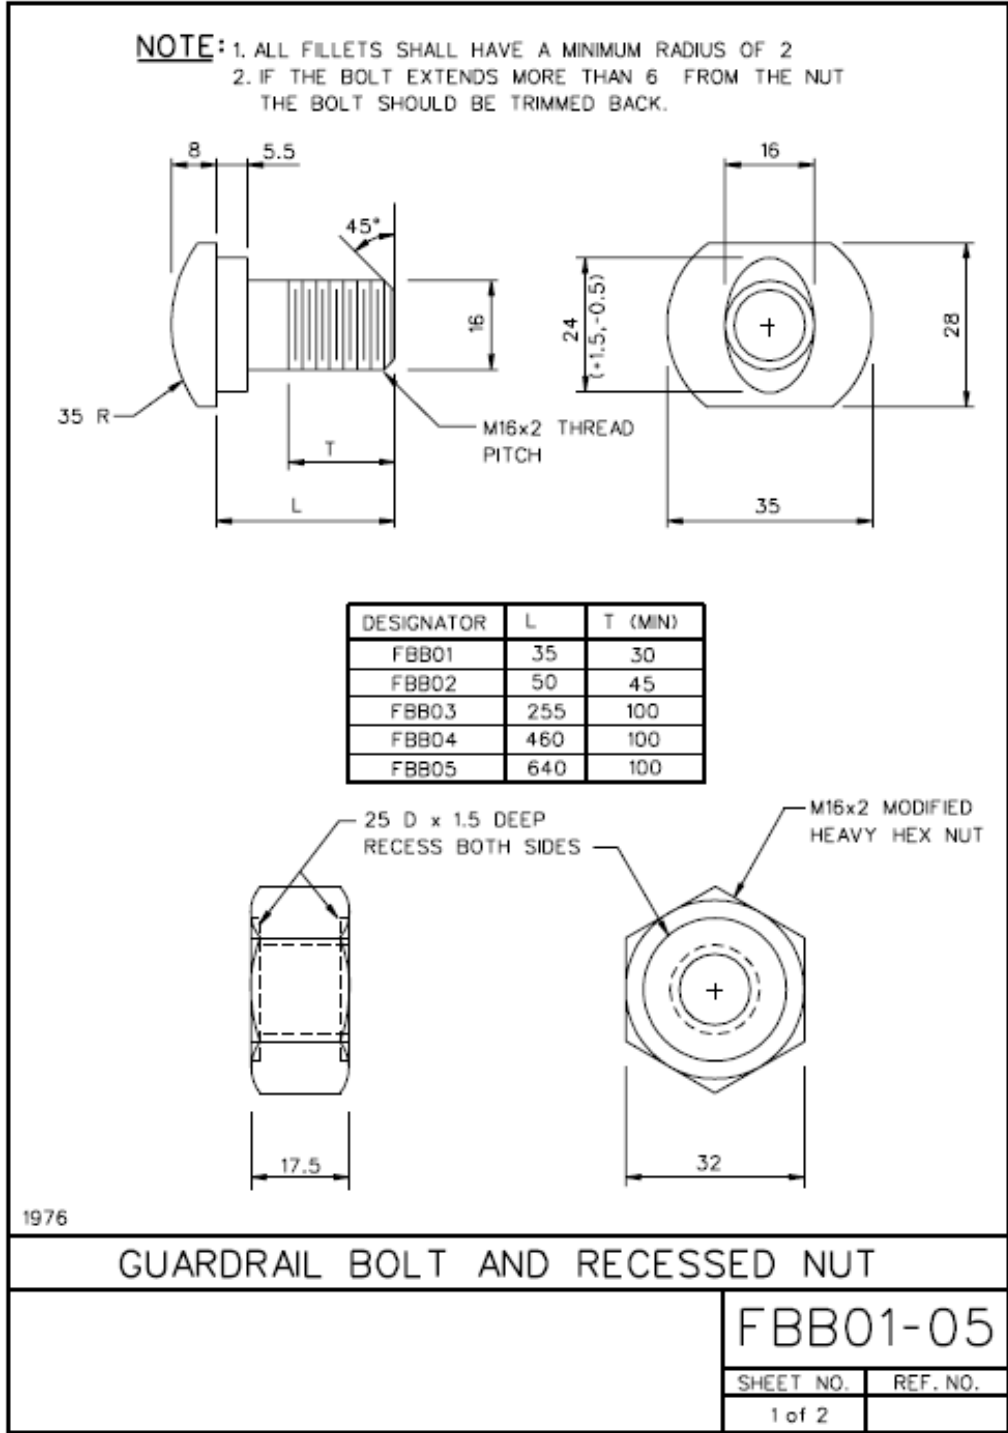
Drawing of the bolt used to fasten the rail element to guardrail posts.
